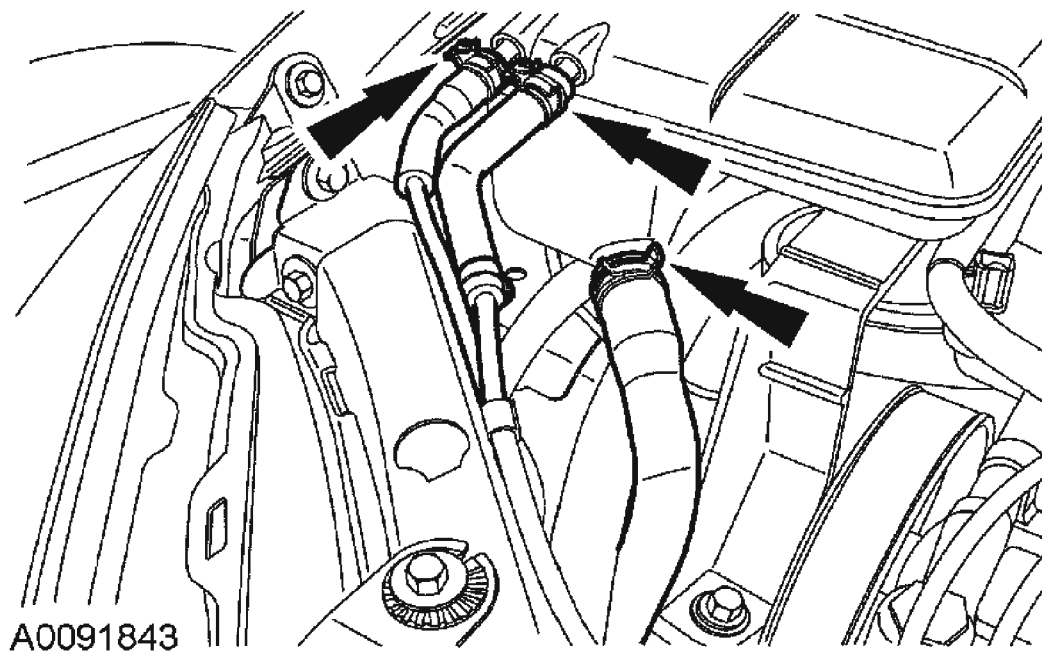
Disconnecting Coolant Hoses From Coolant Expansion Tank
